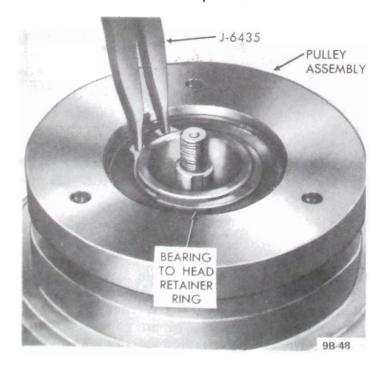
B-55 Removing or Installing Bearing to Head Retainer Ring
